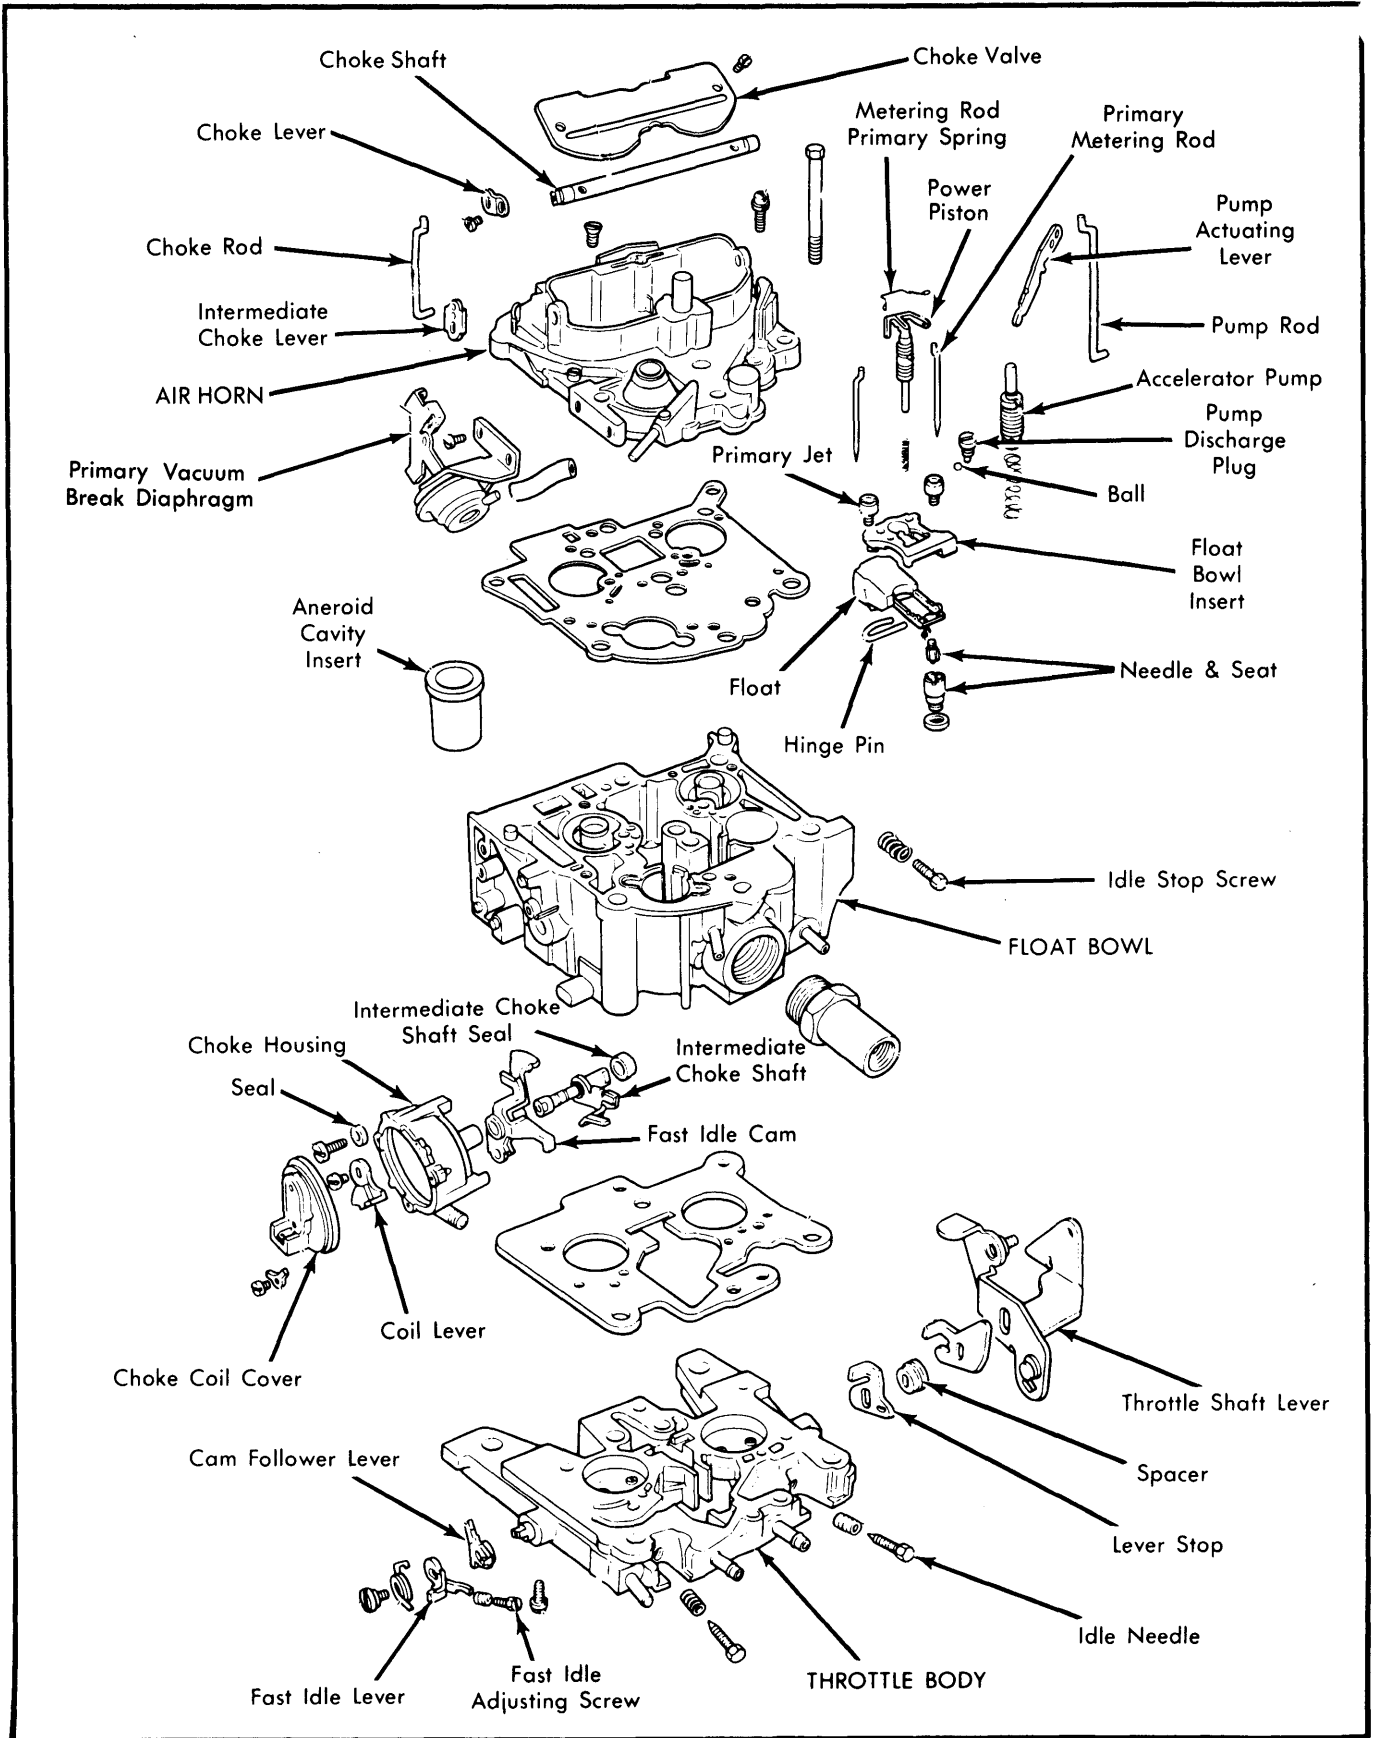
Exploded View of Rochester Model M2MC 2-Barrel Carburetor
